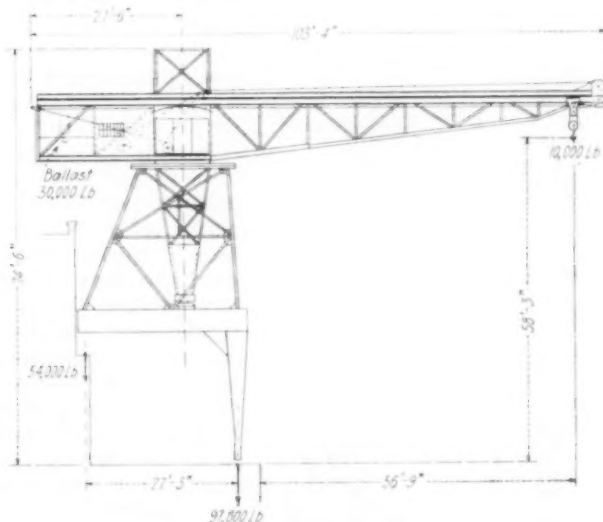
TRANSPORTER CRANE IN WHICH LOAD MAY BE TRANSPORTED TO REAR OF MACHINERY HOUSE; A FEATURE NOT INCORPORATED IN THE CRANE OF FIG. 7
